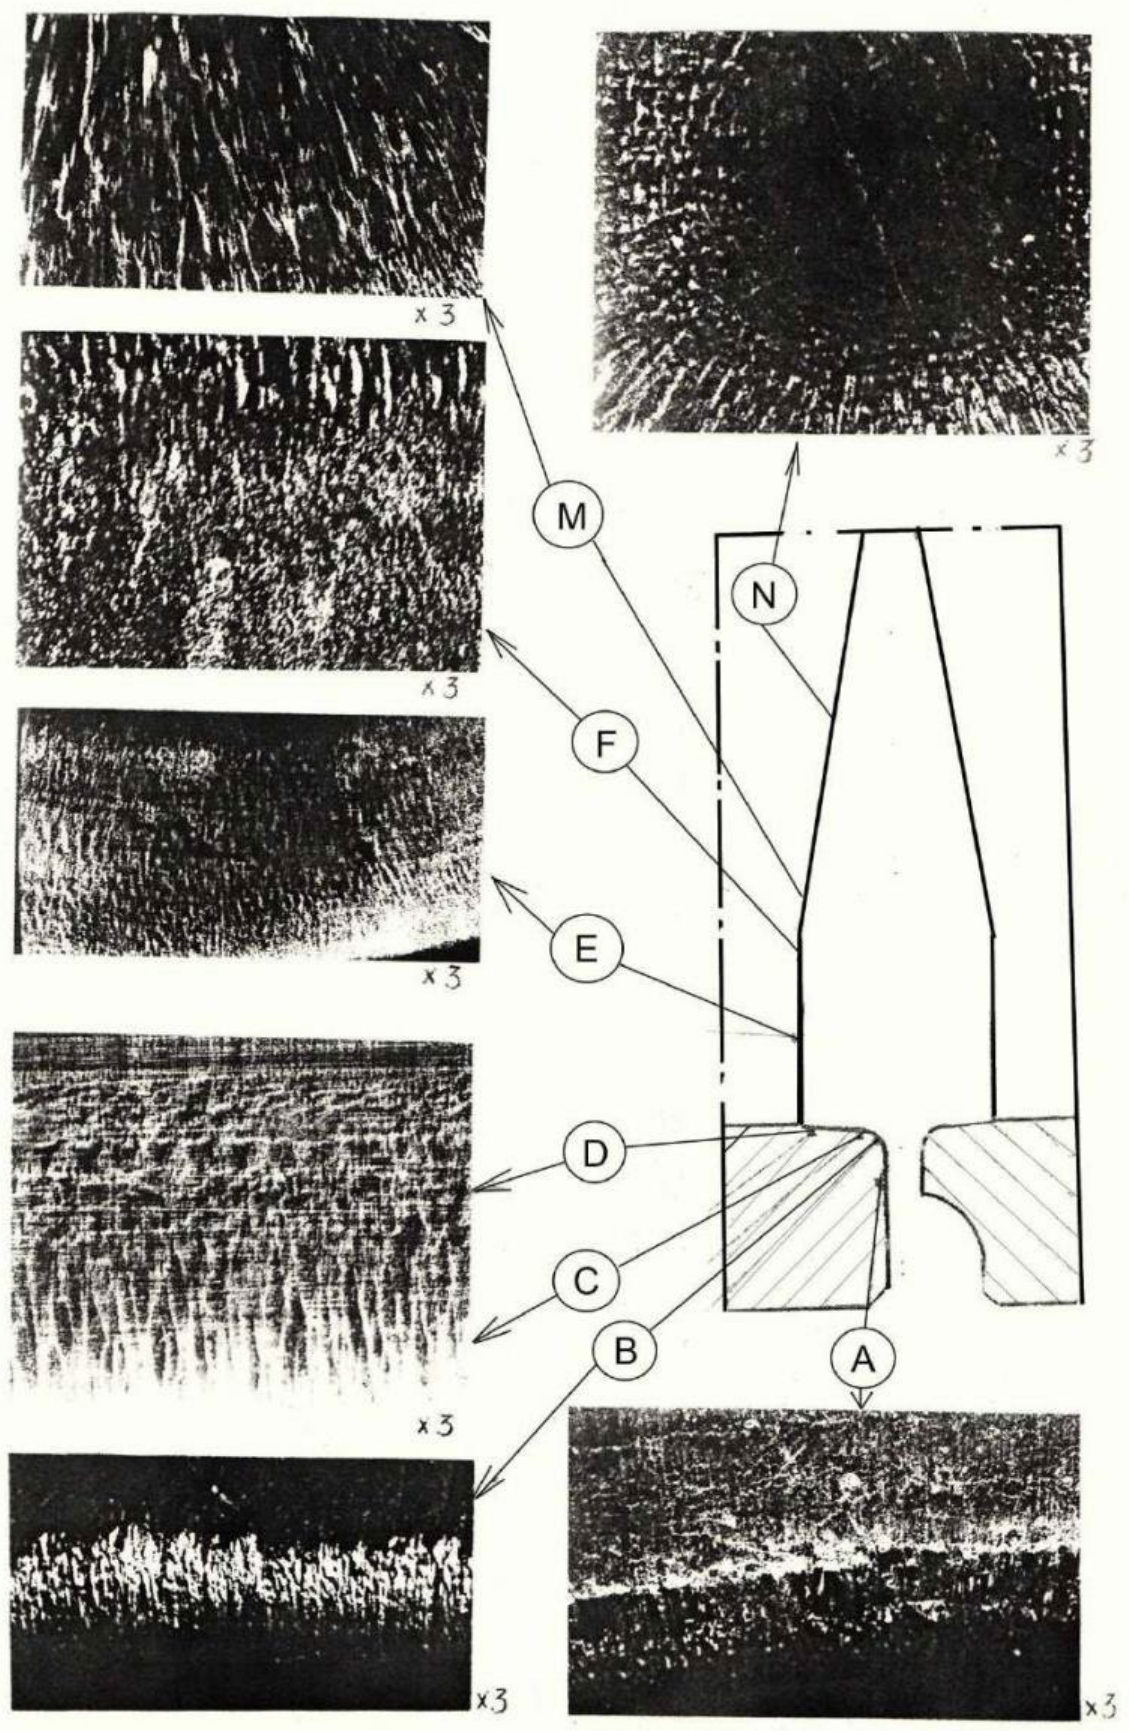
Character damage surfaces peaks And bushings
